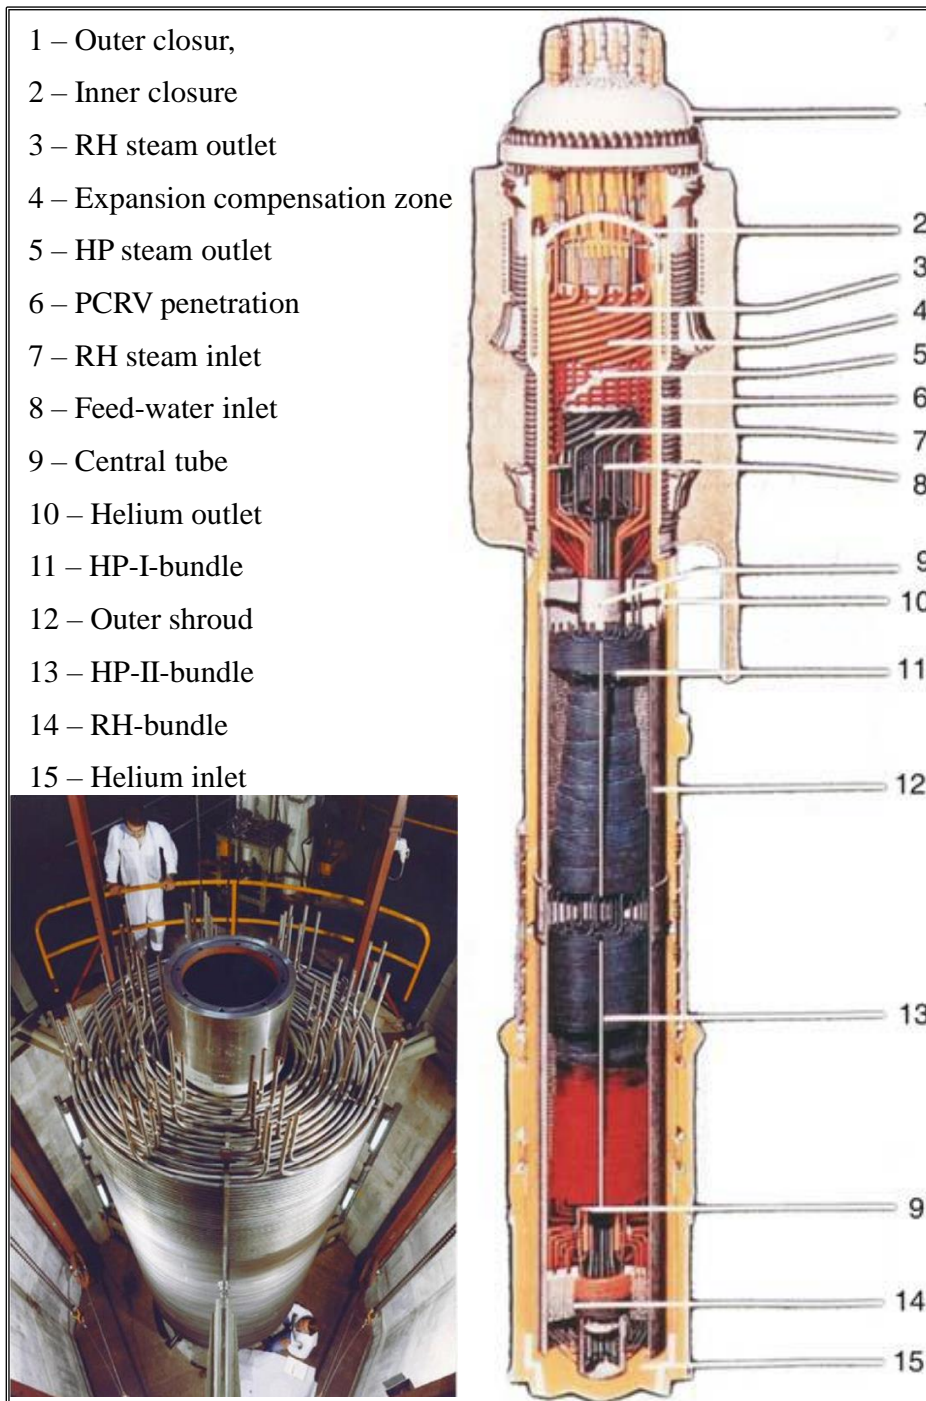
THTR-300 steam generator: bundle manufacturing and cutaway view [110].
